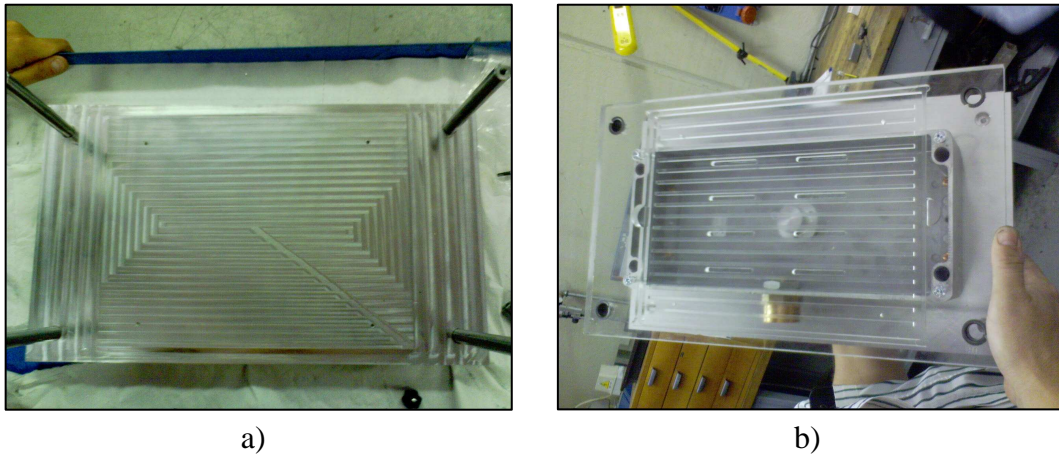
assembler device a) bottom floor, b) top and movable floor
